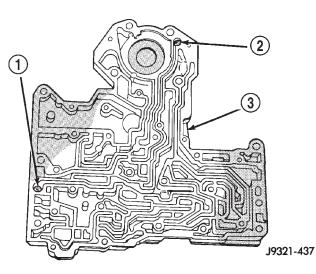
Rear Clutch And Rear Servo Check Ball Locations
